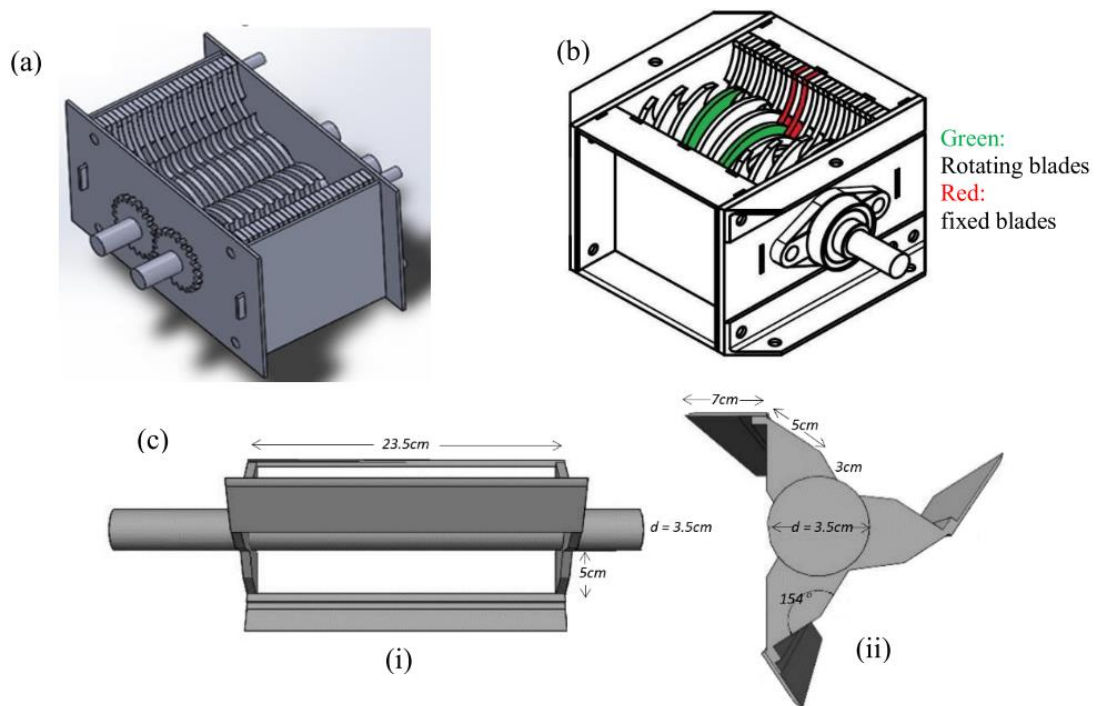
Shredder configurations: (a) Double shafts, (b) Single shaft, (c) Single shaft with horizontal blade (i) side view and (ii) front view.
